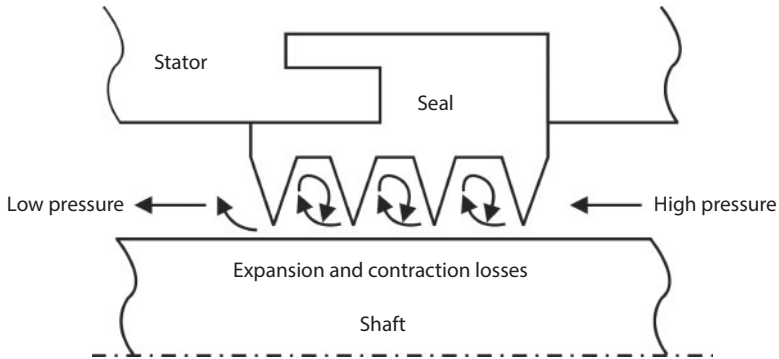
Shaft is rotating and labyrinth teeth are stationary in the bearing housing.
